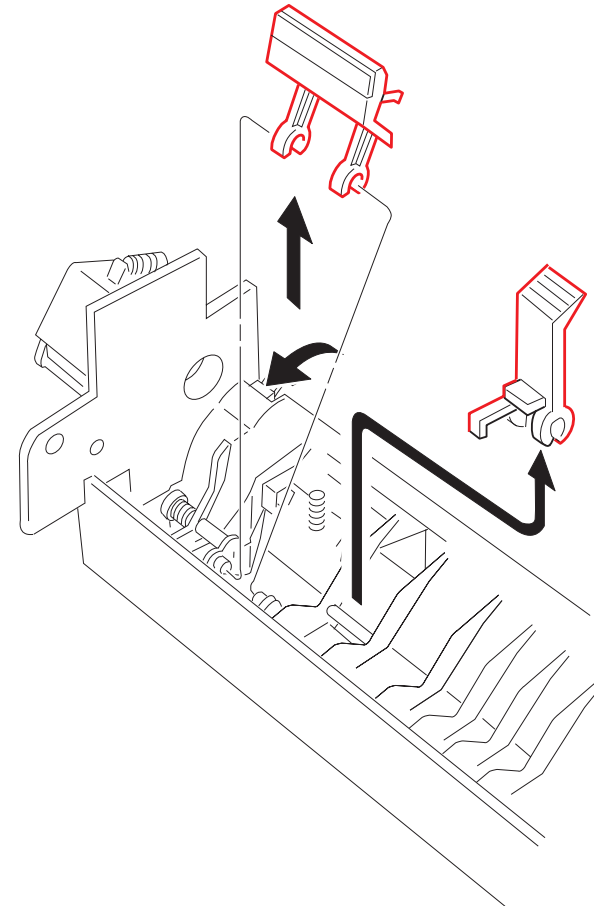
“Pad Assembly / Stopper Paper” Removal
